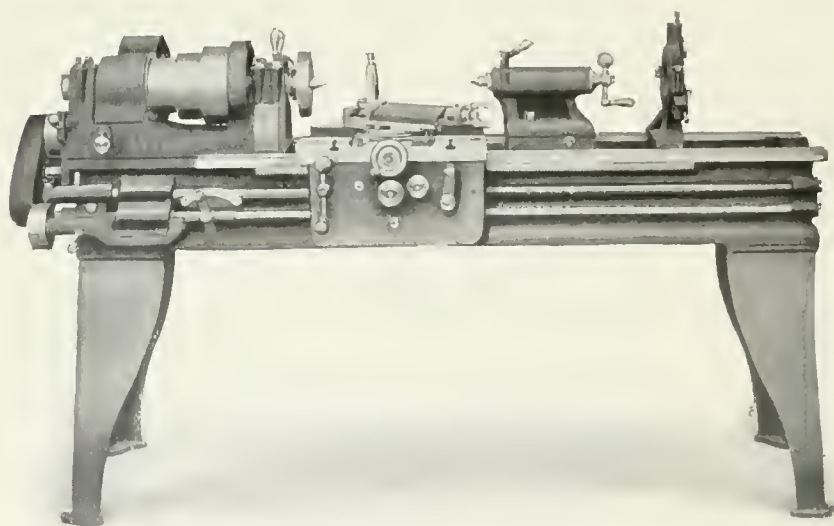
Engine Lathe built by the Willard Machine & Tool Co.
